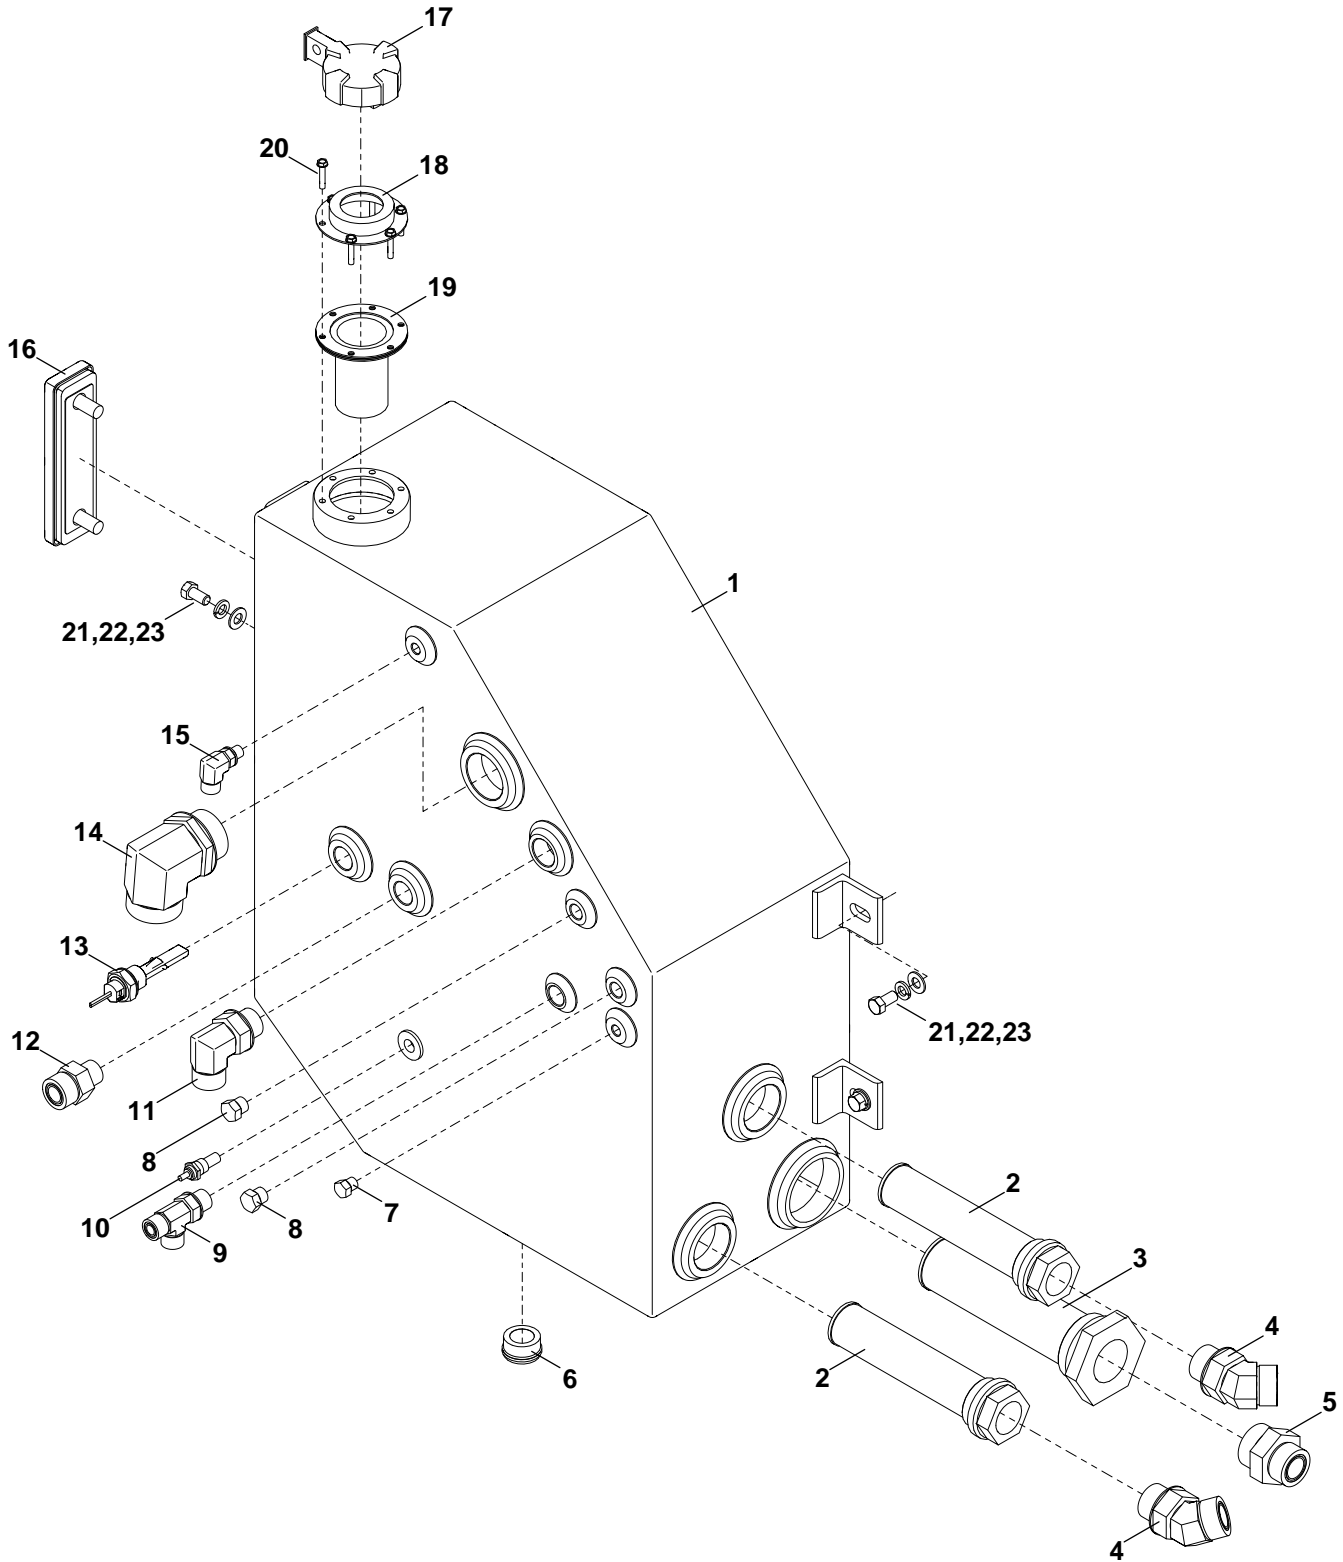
Upper Hydraulic Tank Assembly - Electric Screed Heat
